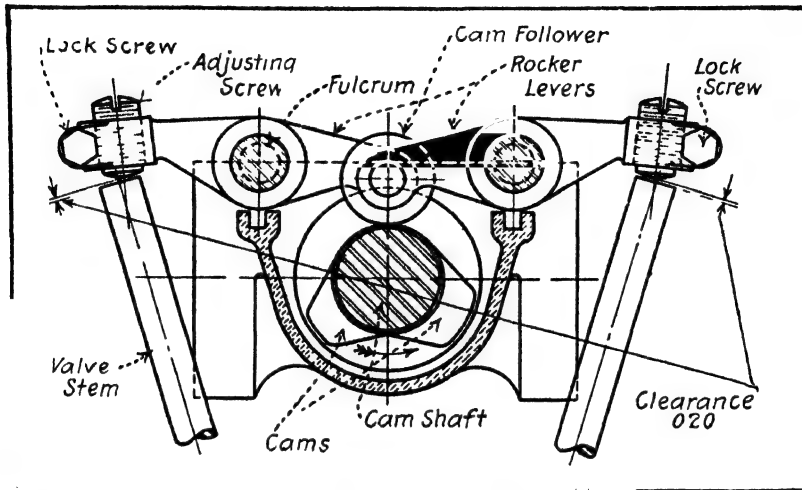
Diagram Showing Proper Clearance to Allow Between Adjusting Screw and Valve Stems in Hall-Scott Engines.
